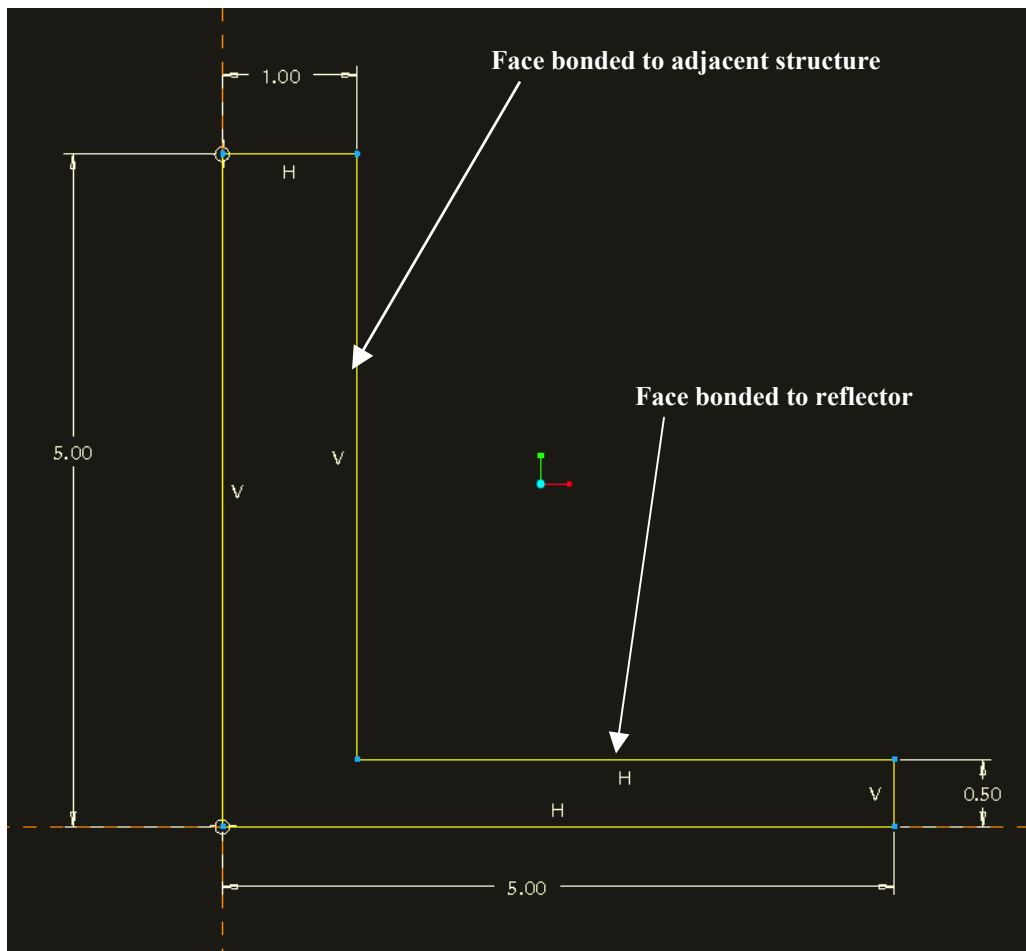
Individual Support Strut Cross Section w/ Dimensions (mm)
